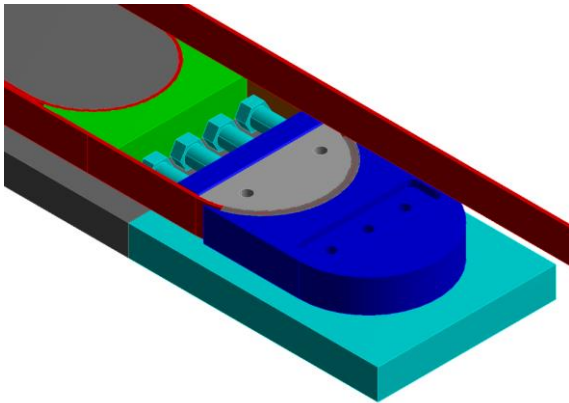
Assembly of threaded, outer pressing plates and pressing screws.
